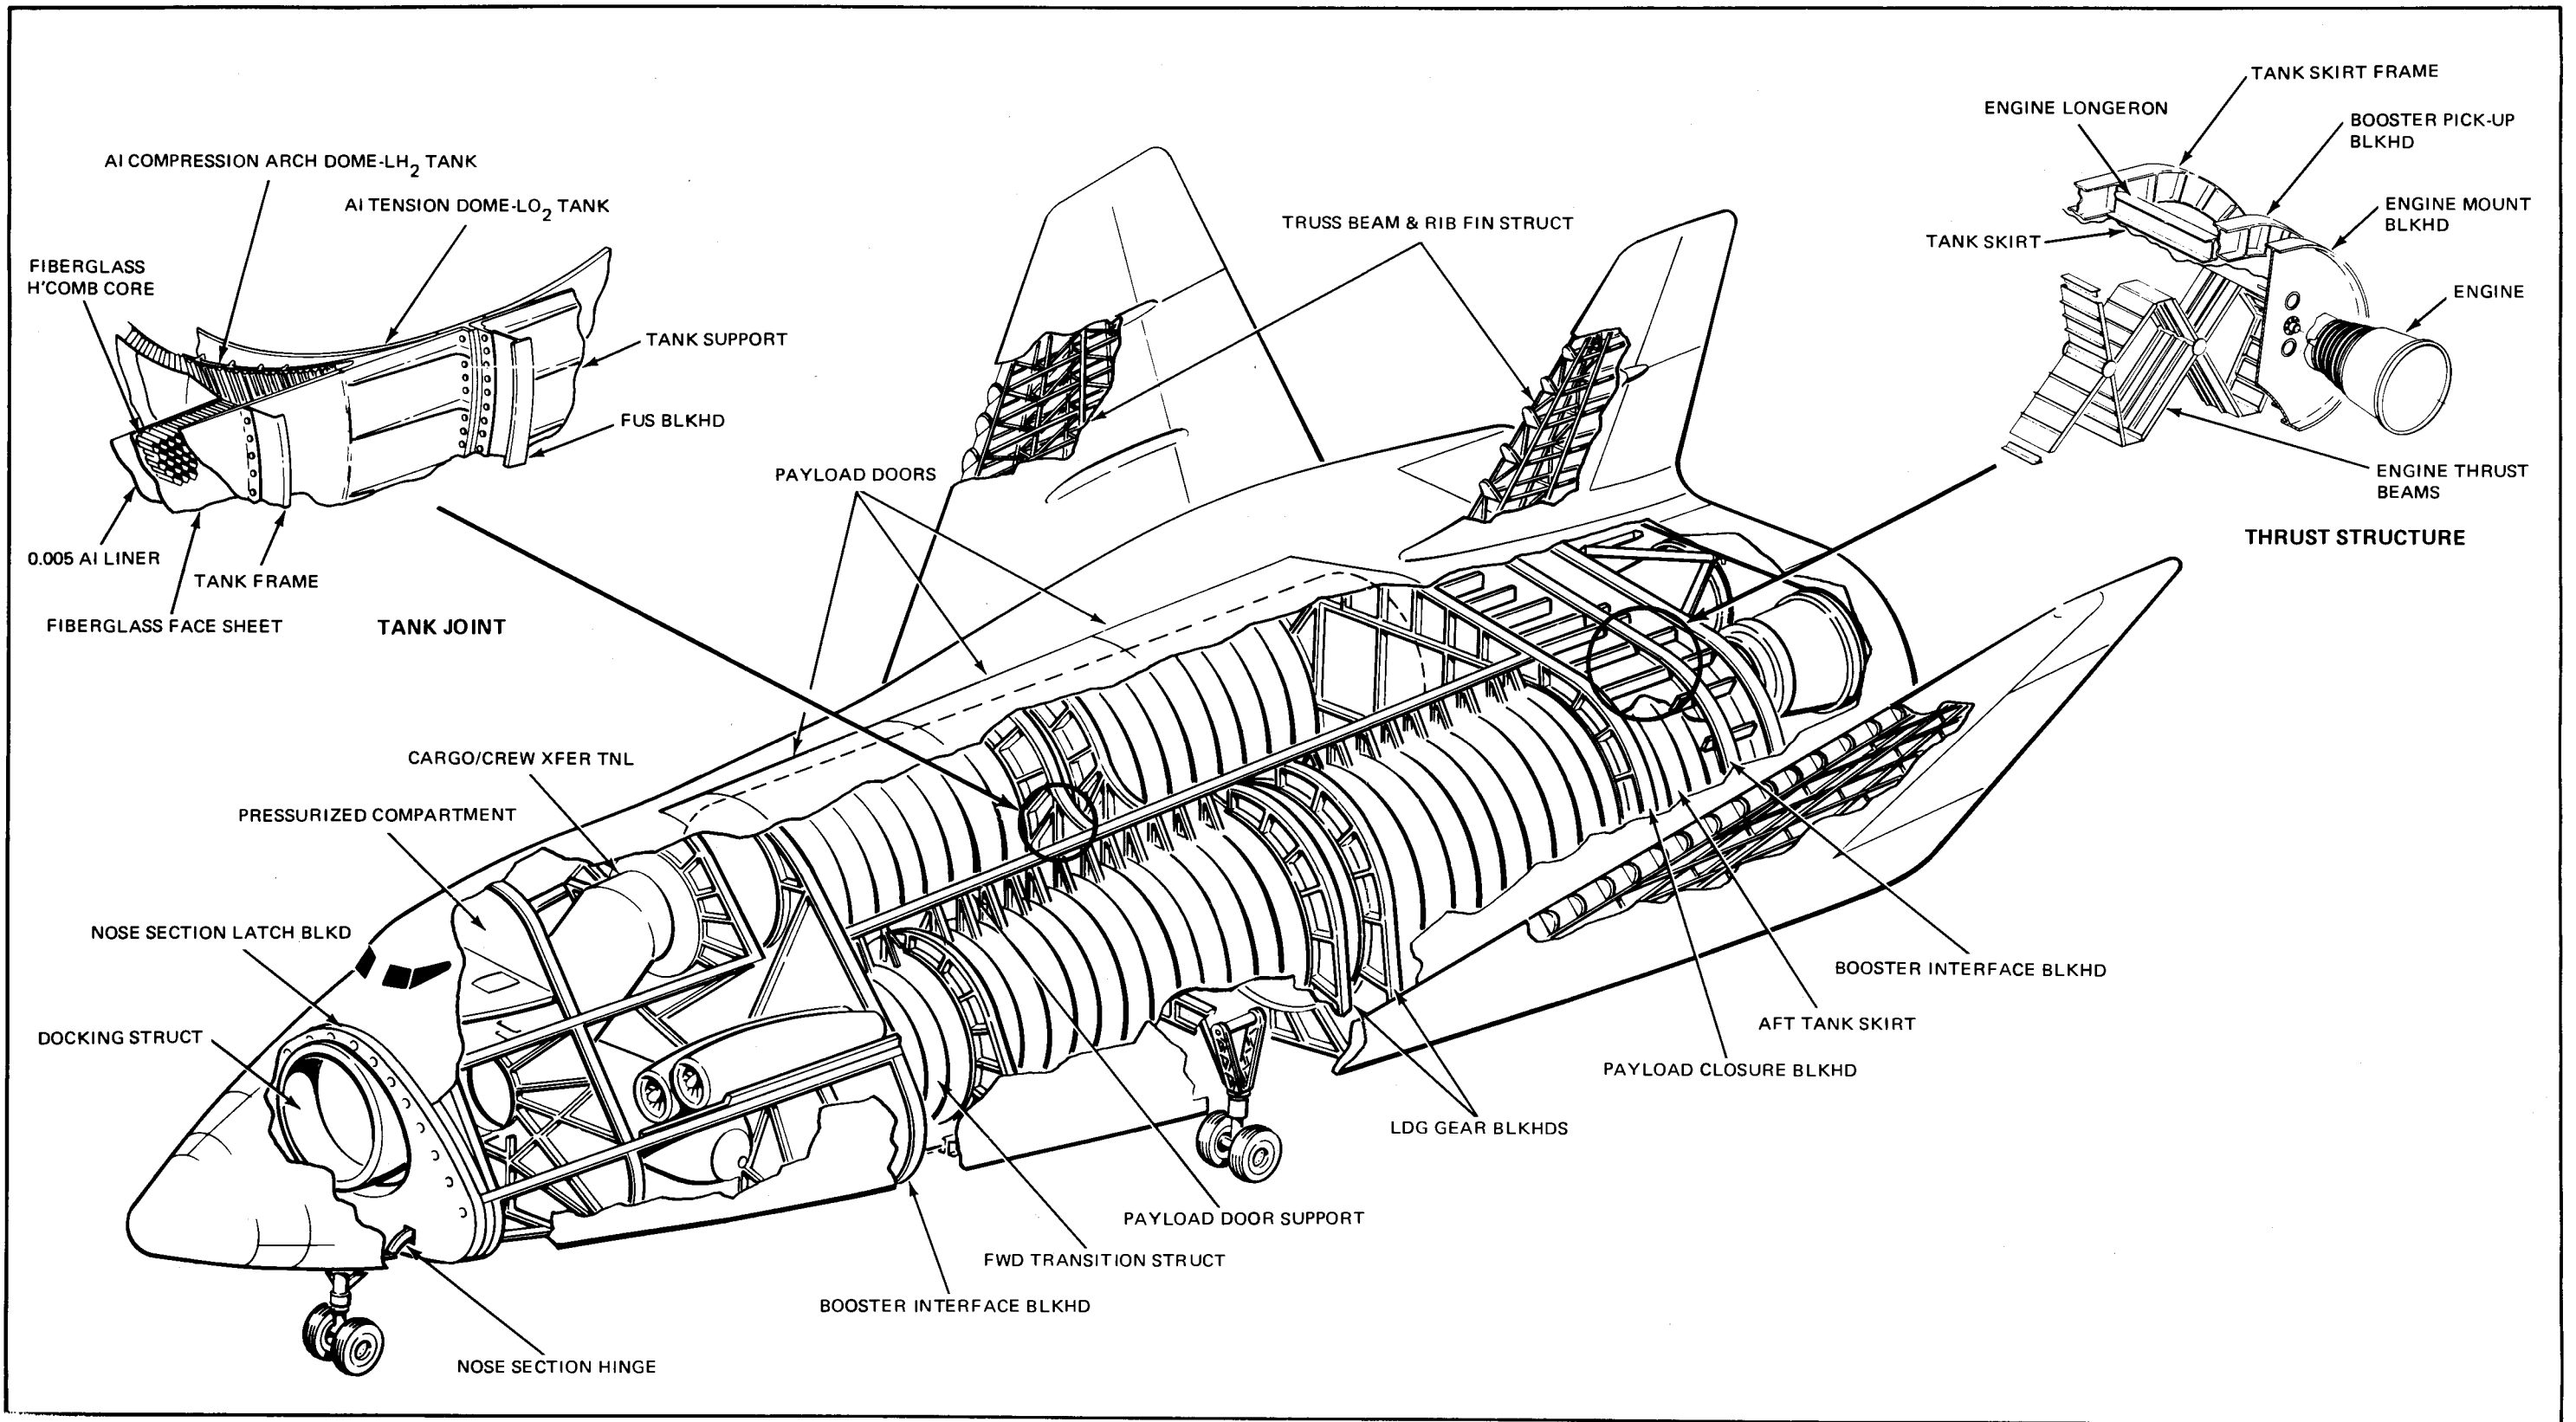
Design 532 Orbiter Structural Arrangement
